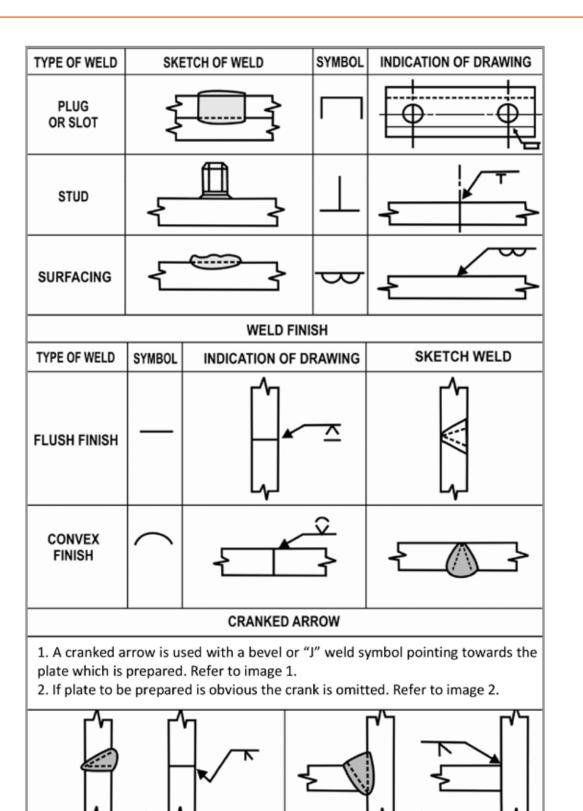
How Welding Symbols are used
